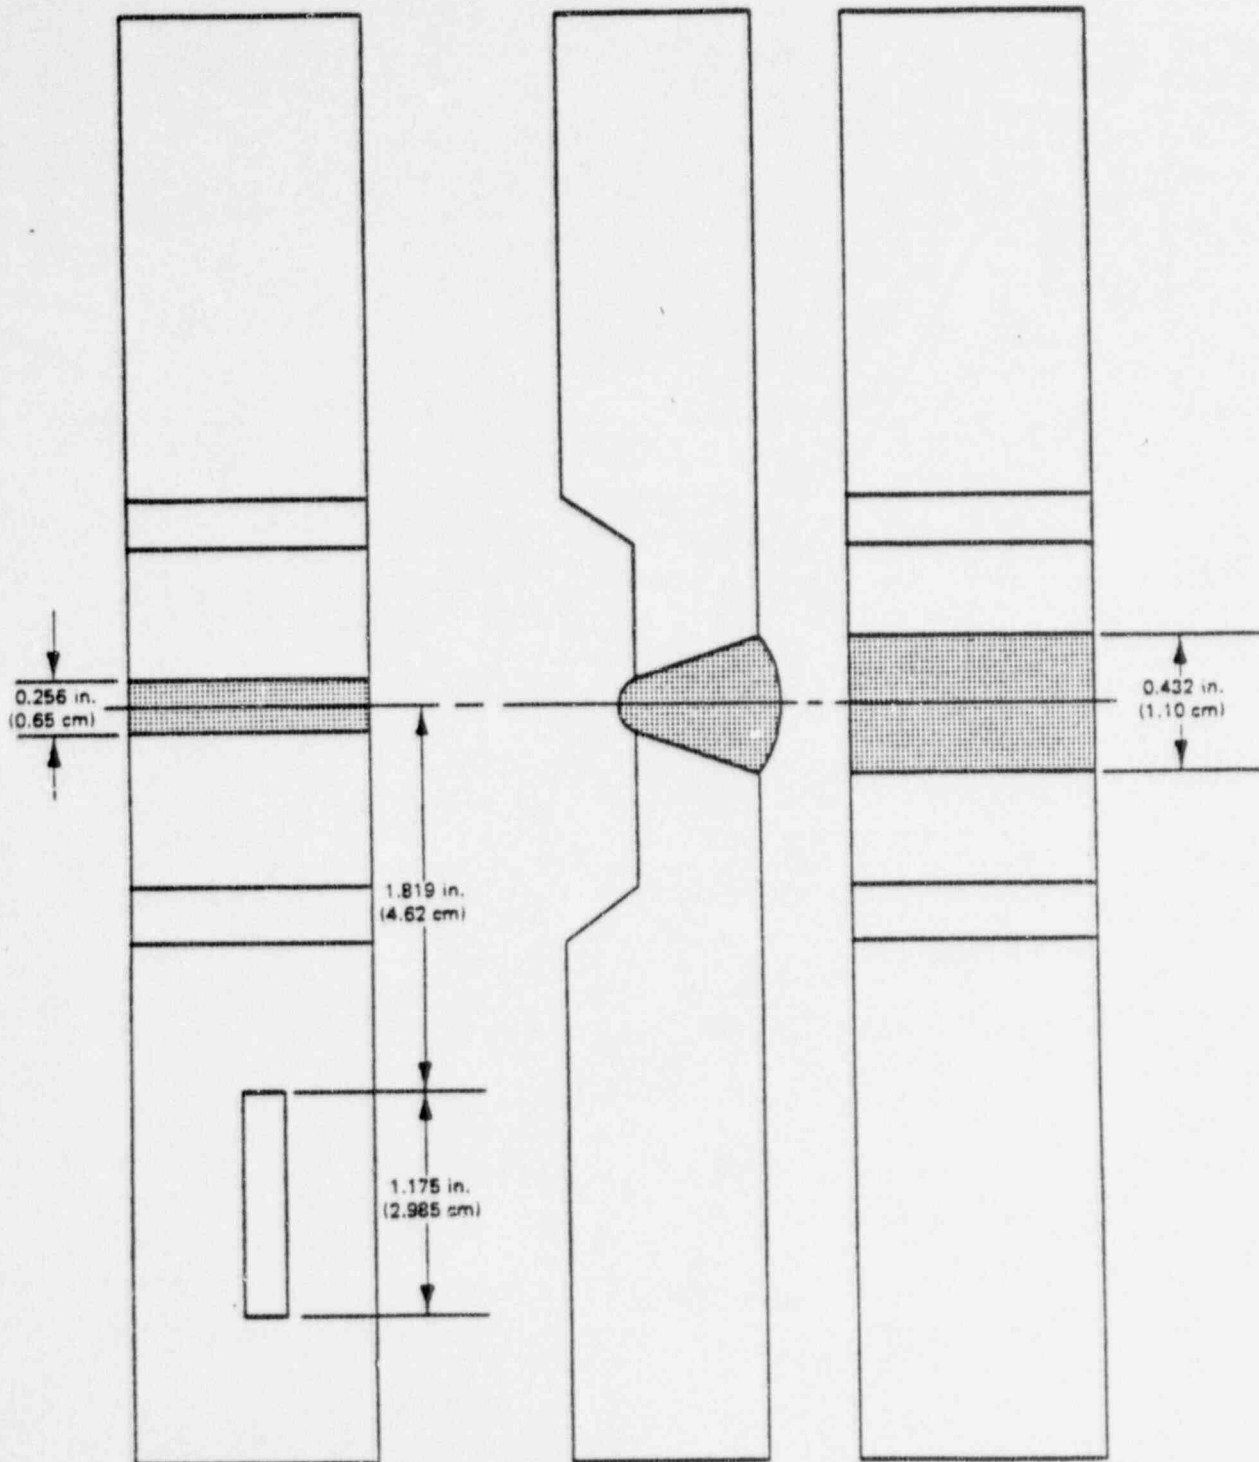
Location of Weldable Strain Gage on 10.16-cm (4-in.) (Stress Relieved) Pipe Specimen
